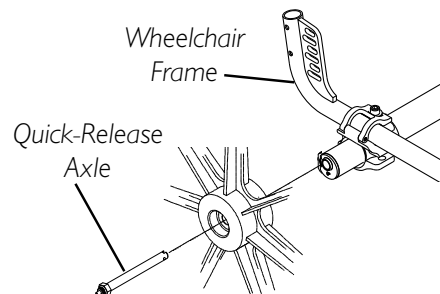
REMOVING/INSTALLING REAR WHEELS
